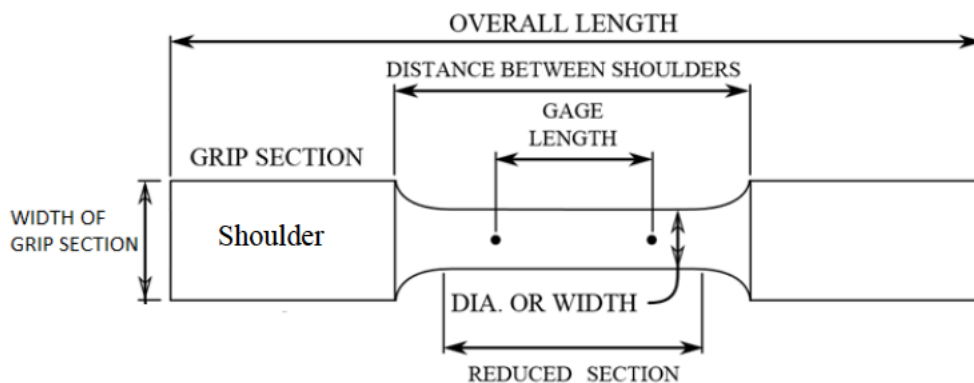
The cross section for a typical specimen for tensile testing.
